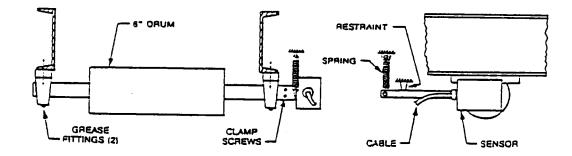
ATTACH SENSOR ONTO DRUM ASSEMBLY
